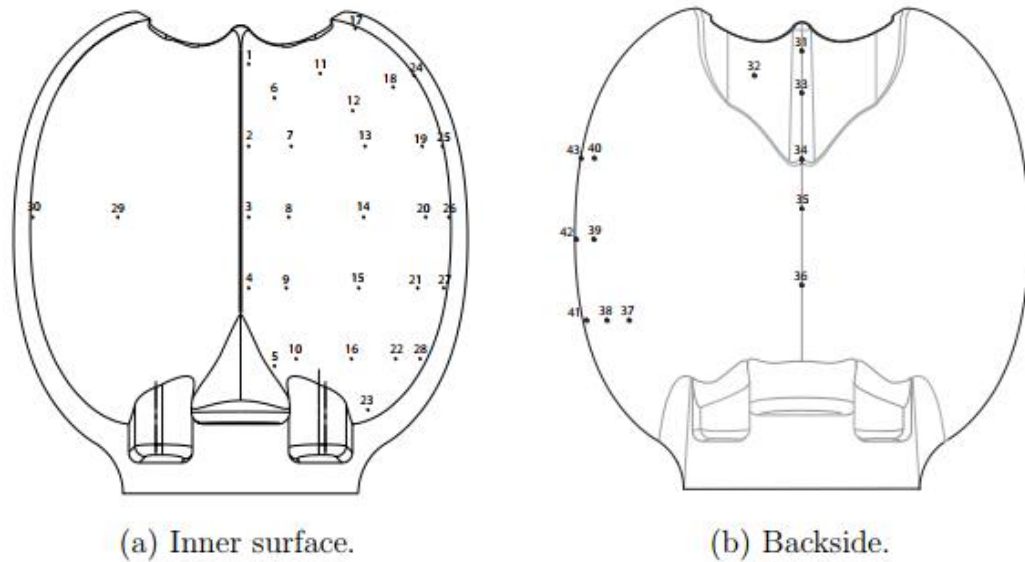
Pressure sensor locations on inner and backside of bucket [26]
